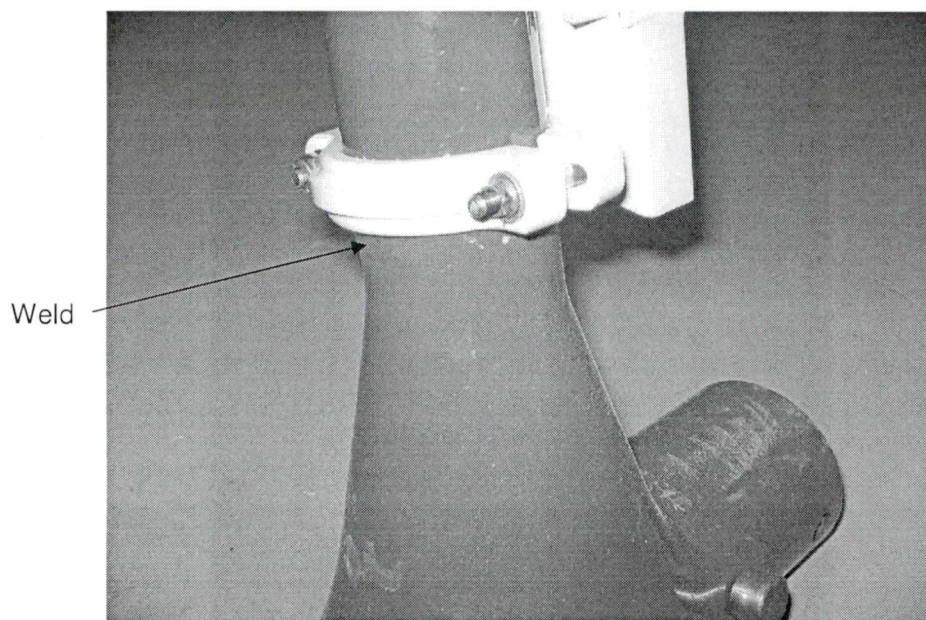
Aft Beam Installation, Bottom Clamp
